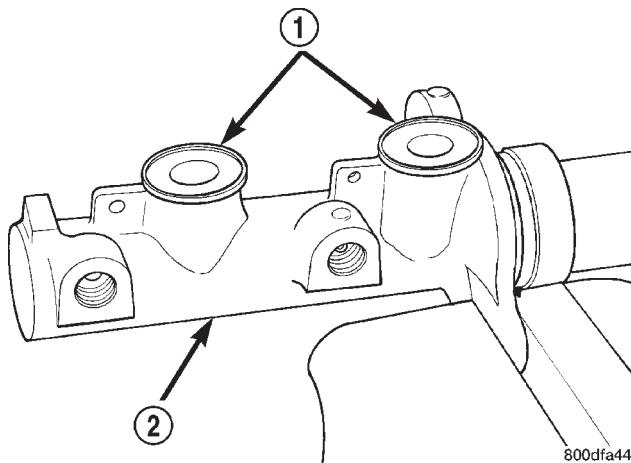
Master Cylinder To Fluid Reservoir Seal Grommets
